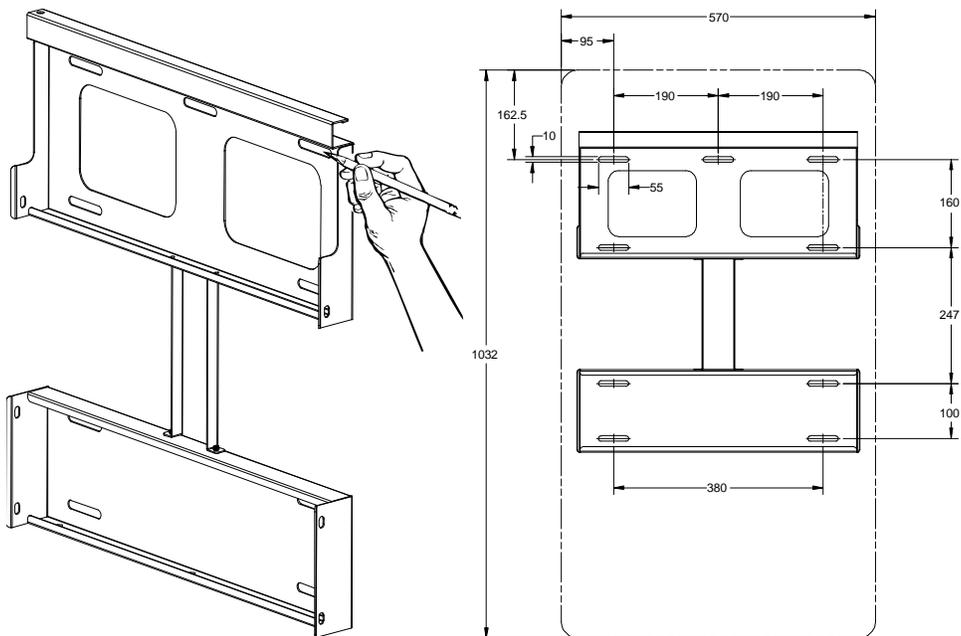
Mark the Mounting Holes of the Mounting Bracket
